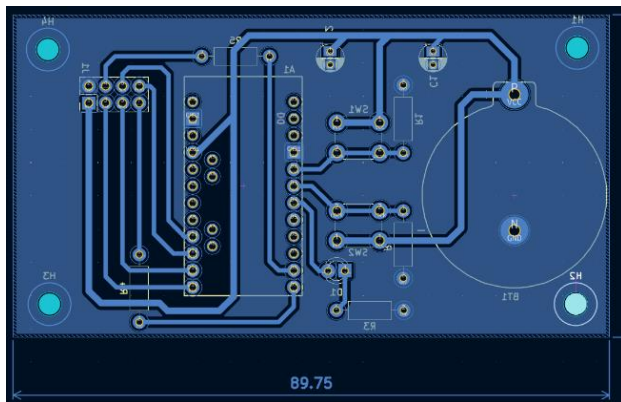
PCB layout of Key Fob on KiCad to print out on toner-transfer paper
